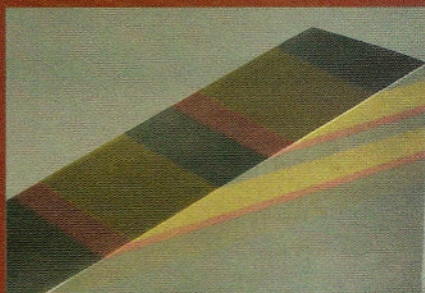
Eight metallic layers were explosively welded in multiple operations to produce this colorful ornamental stack.
